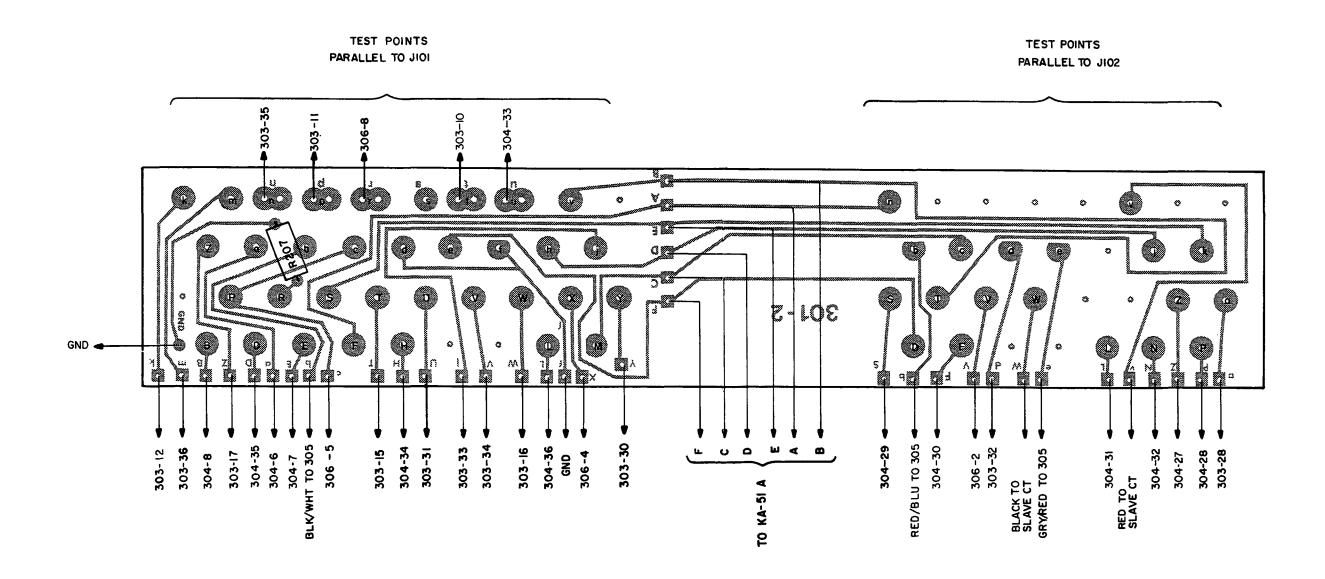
P.C. BOARD ASSEMBLY, BOARD 301-2, DRAWING (Dwg. 300-05986-0000 Rev. 0)
